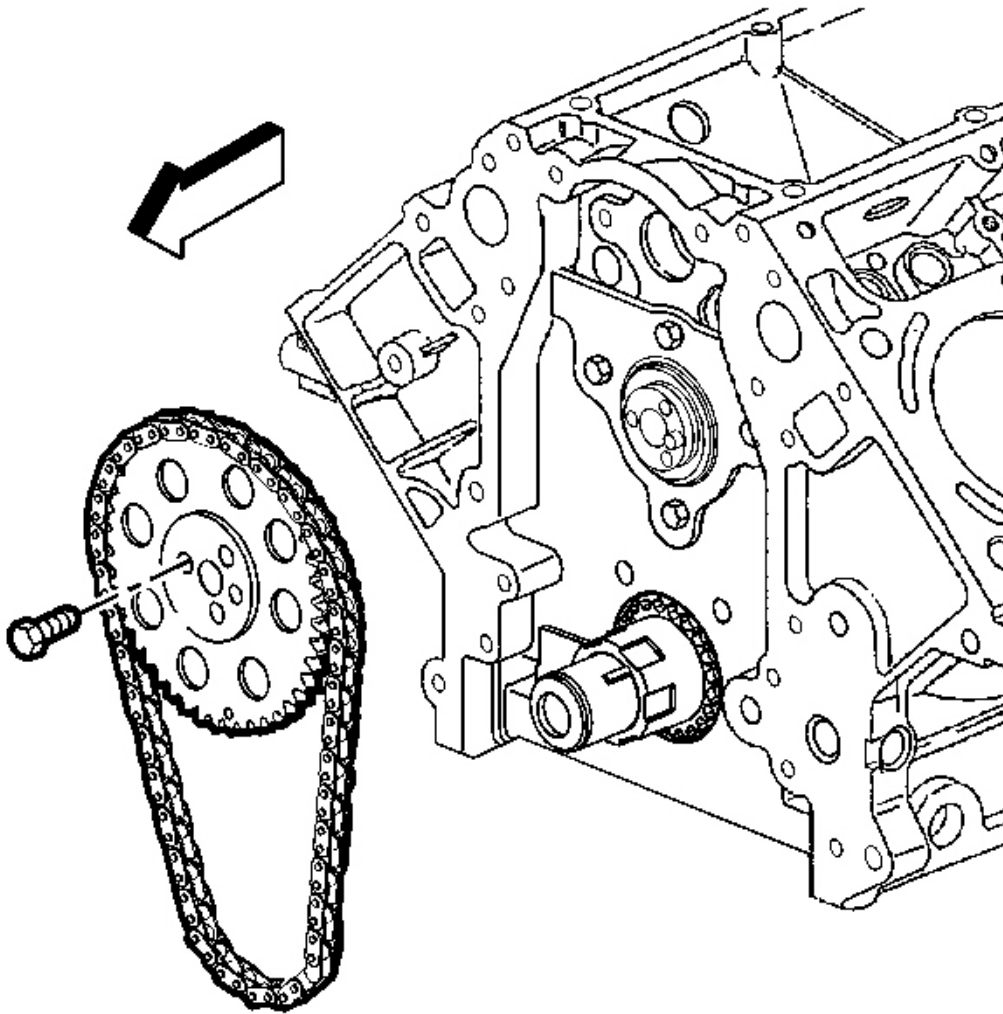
View Of Camshaft Sprocket, Bolt & Timing Chain
